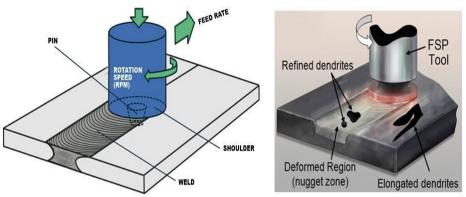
Friction Stir Welding (left) and Friction Stir Processing
